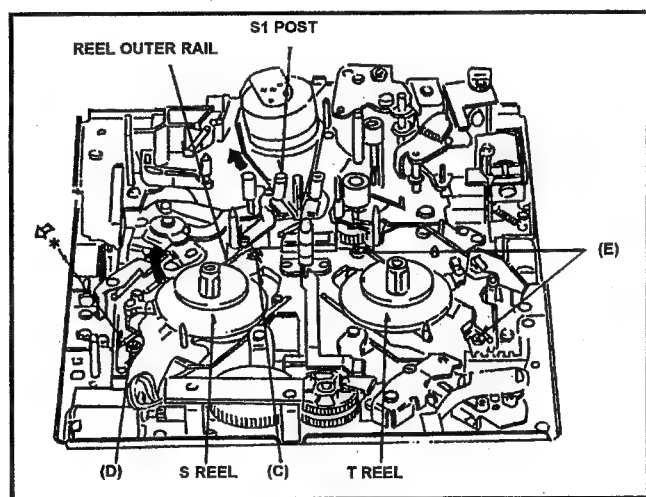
Removal of S & T Reel Rotor Unit
